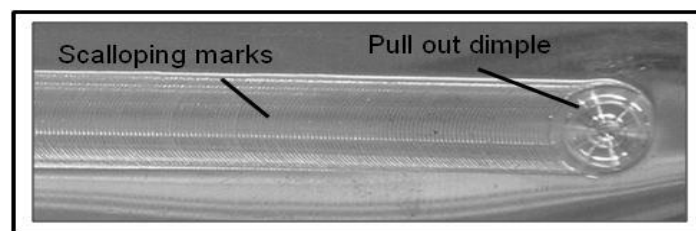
, Dimple Feature Produced when the Tool is removed from the Material
